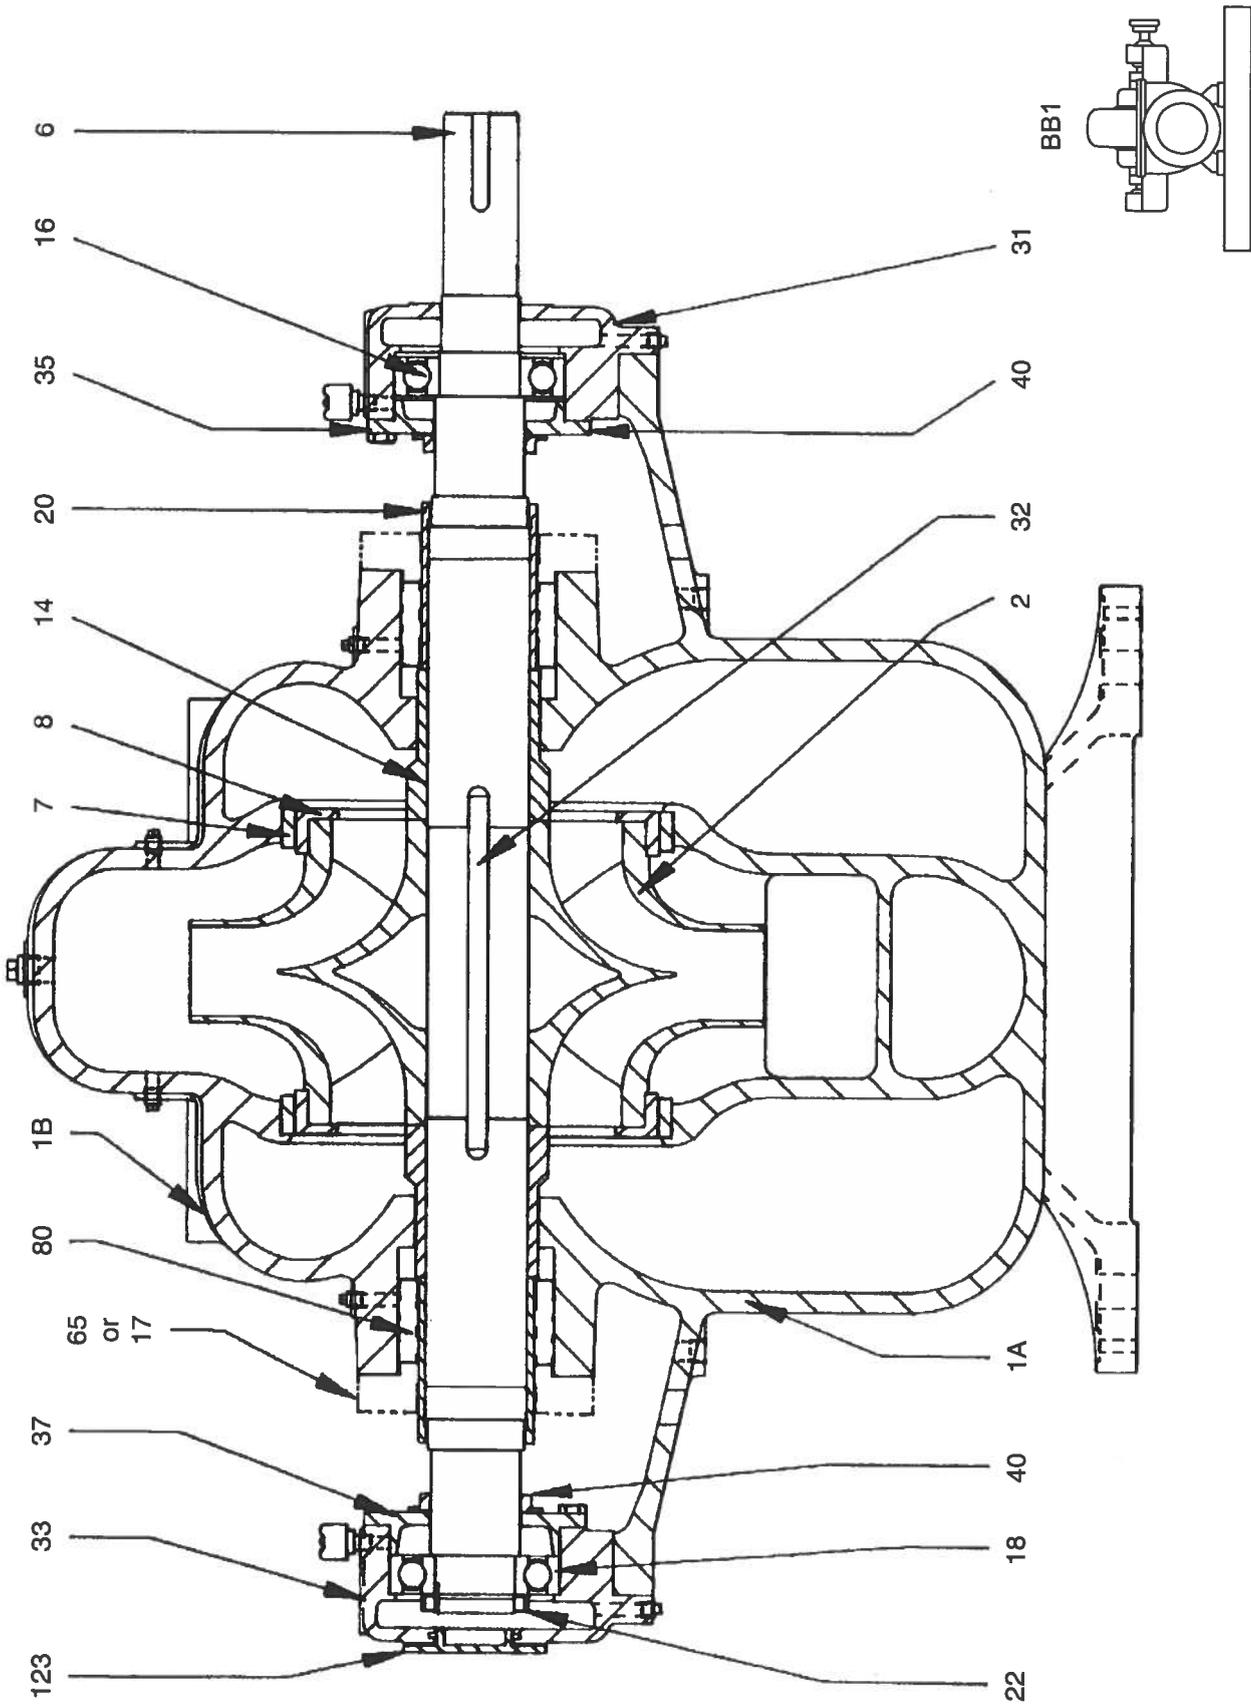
Impeller between bearings – flexibly coupled – single stage – axial (horizontal) split case
